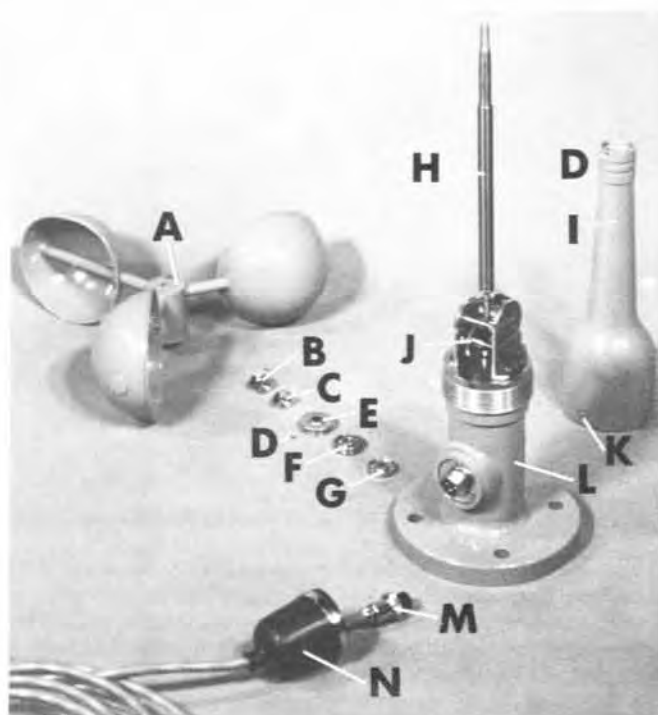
WeatherMeasure W164 contacting anemometer: A, cups; B, cap lock nut; C, cap nut; D, top lock screw; E, bearing oil seal; F, top bearing; G, bearing oil seal; H, drive shaft with worms; I, top housing; J, drive gear; K, top housing lock pin; L, bottom housing; M, cannon plug; N, weather boot.
